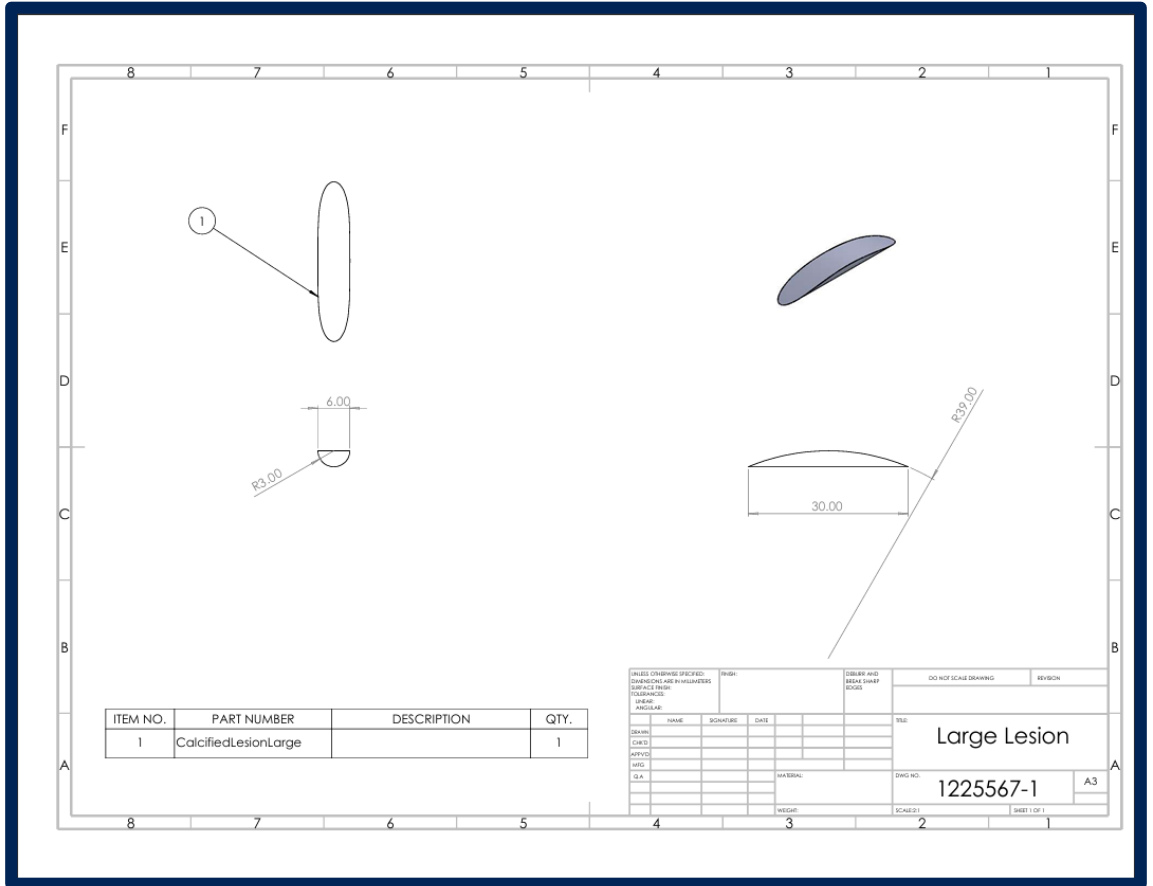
Drawing of Component [PN: 1225567-1 \_Large Lesion]
